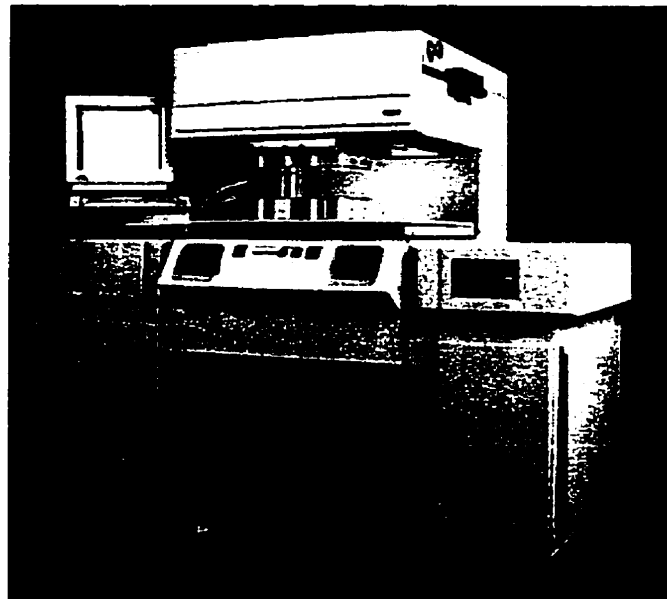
Bare Board Flying Probe Tester [source: Bath Scientific]
